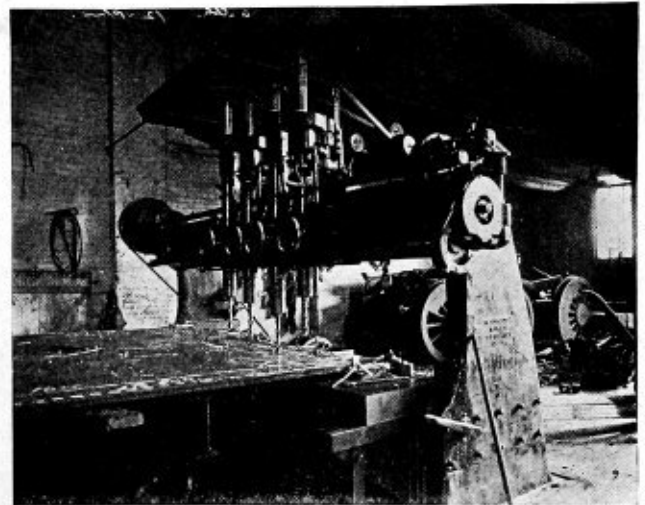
Foote-Burt Four Spindle Drilling Machine in Operation
